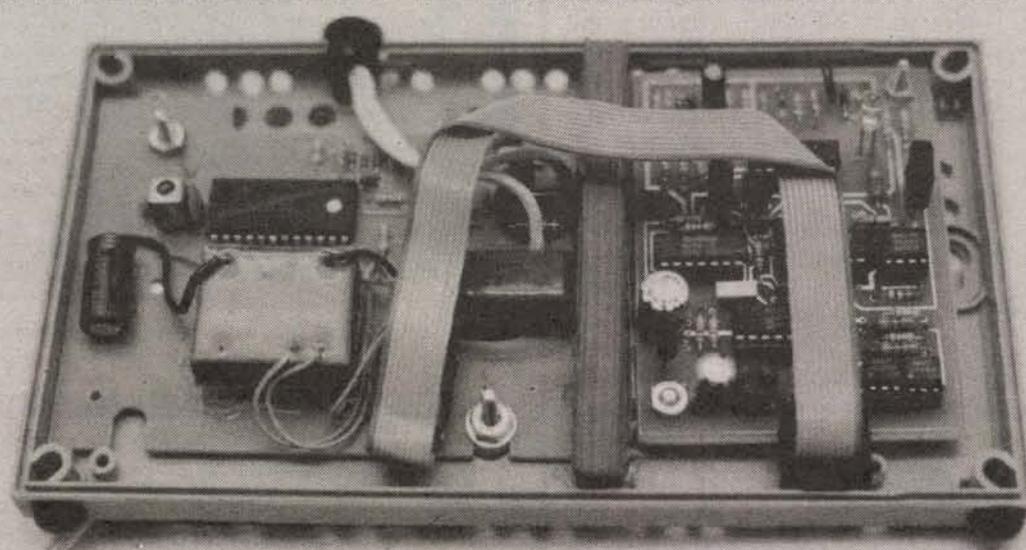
Mini controller and THX10 PC boards in half of the enclosure.
